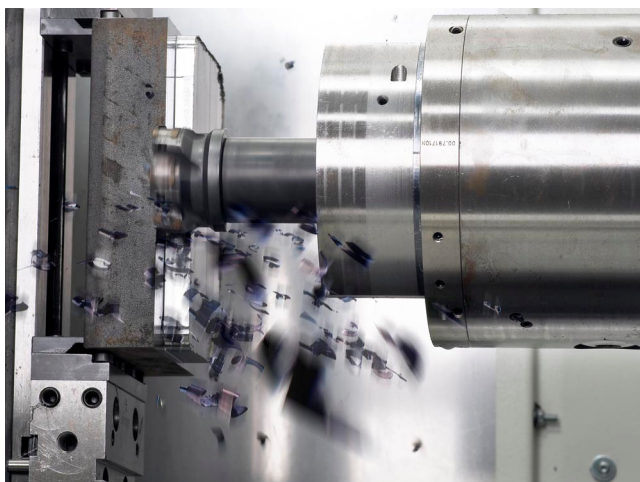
Design principles, the safety of which has been tried and tested in machine tools:
